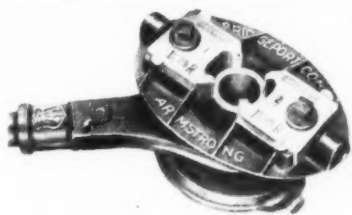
Ratchet Type Die-stock for Armstrong Adjustable Dies
